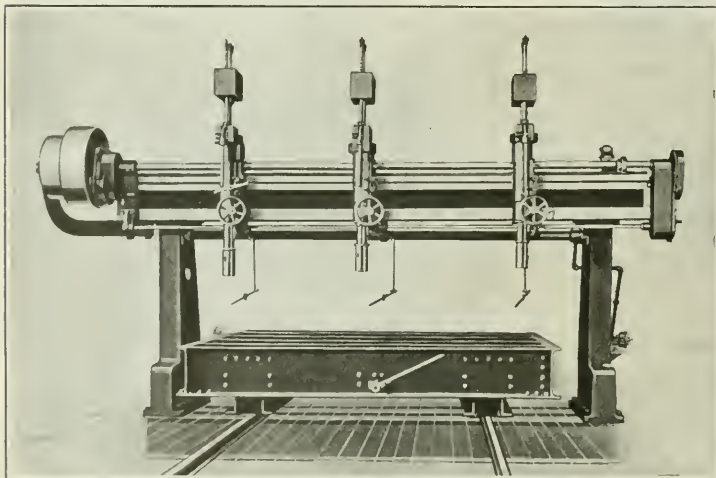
No. 19 Multiple-spindle Rail Drilling Machine built by Edwin Harrington Son & Co., Inc.
